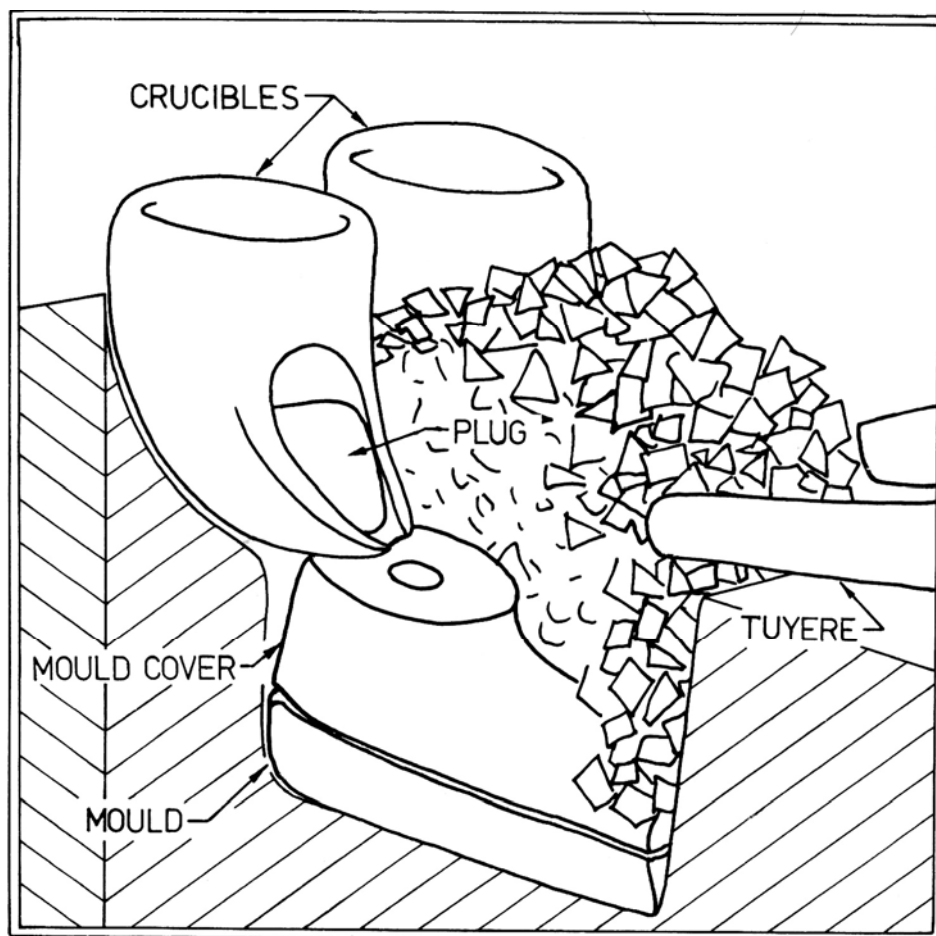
A cutaway reconstruction of the proposed melting furnace using the crucibles, mould covers and moulds.
